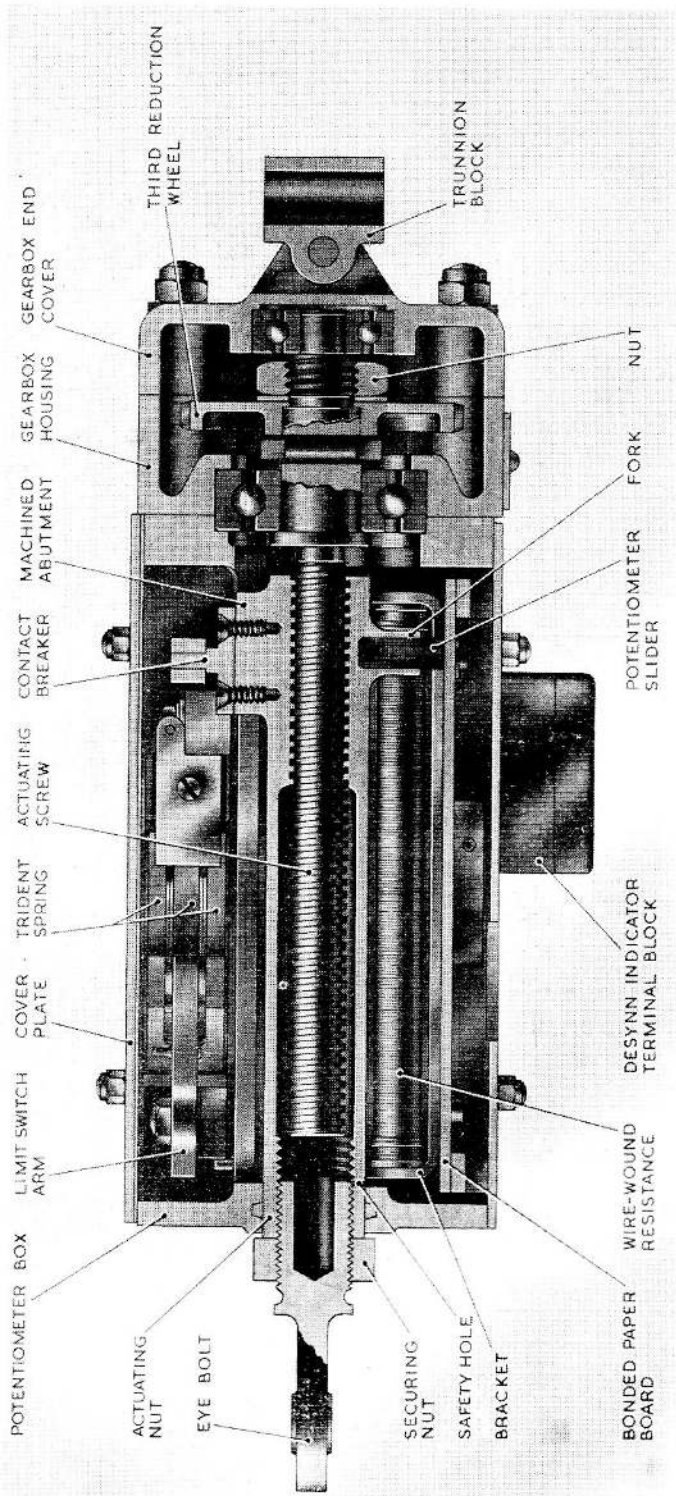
Sectional drawing of actuating nut and screw mechanism
